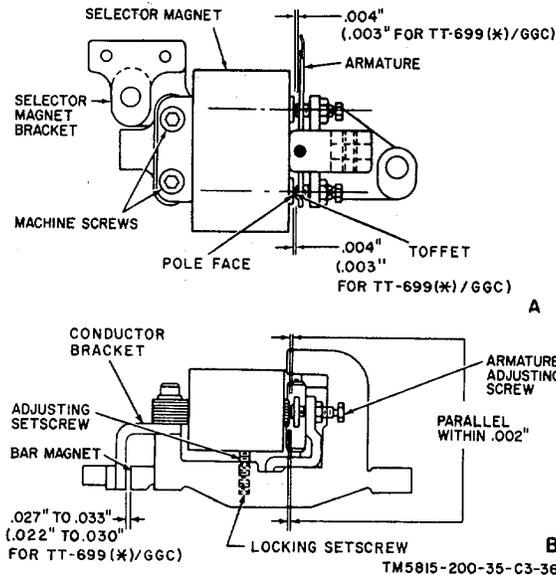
Selector-magnet pole faces and armature alignment requirements.
